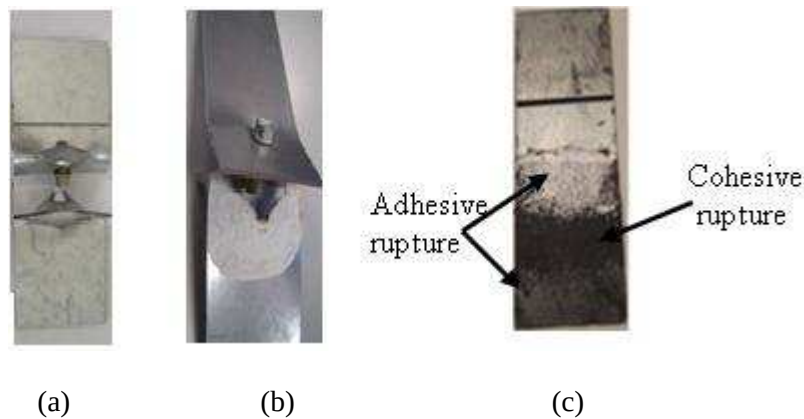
Rupture of shearing: riveted joint (a), screwed joint (b), bonded joint (c)
